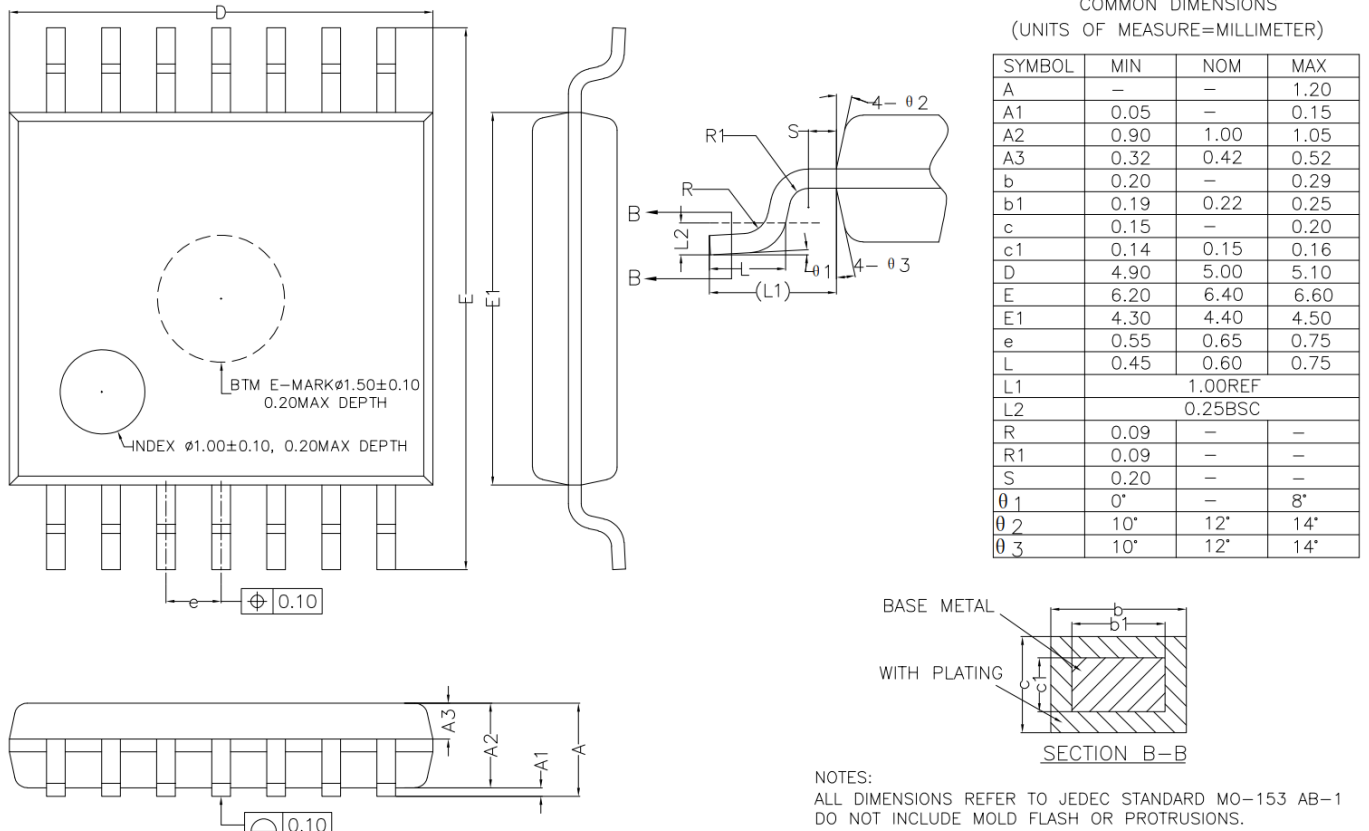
1 TSSOP14 package shape and dimension in millimeters for NCAS0104-Q1TSKR
